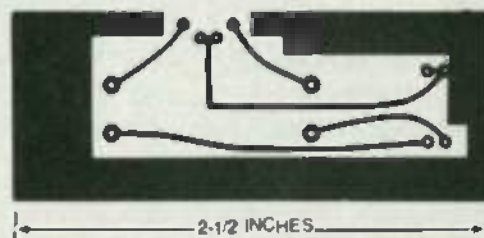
FULL-SIZED FOIL PATTERN for the TCC board. That board mounts in the conversion box.
